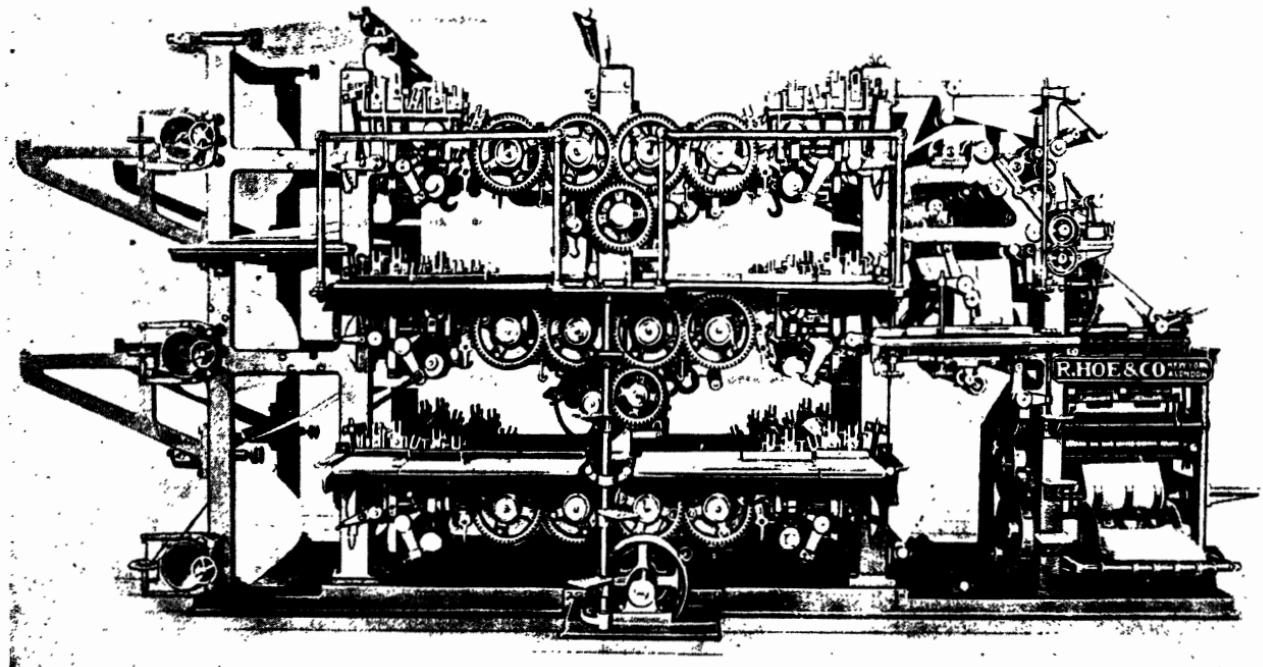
News printing press with unguarded parts. (*Courtesy of R. Hoe and Company, Inc.*)
